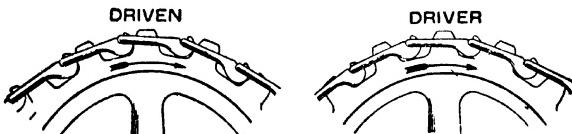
Detachable sprocket chain should be run as shown. Hooks up and running first.
